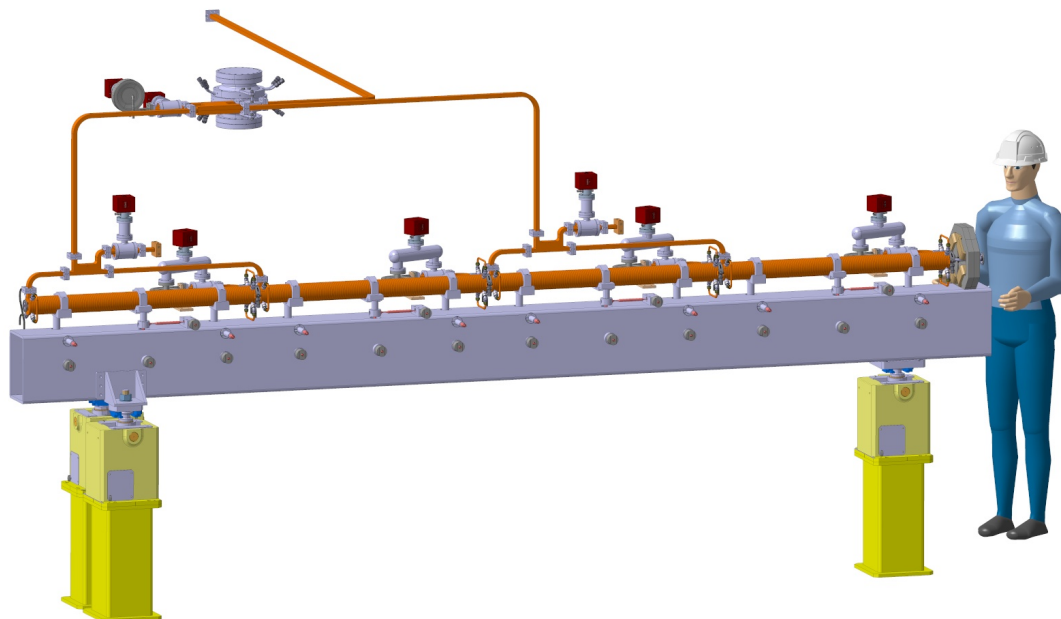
Engineering design 3D view of a typical XLS module.
